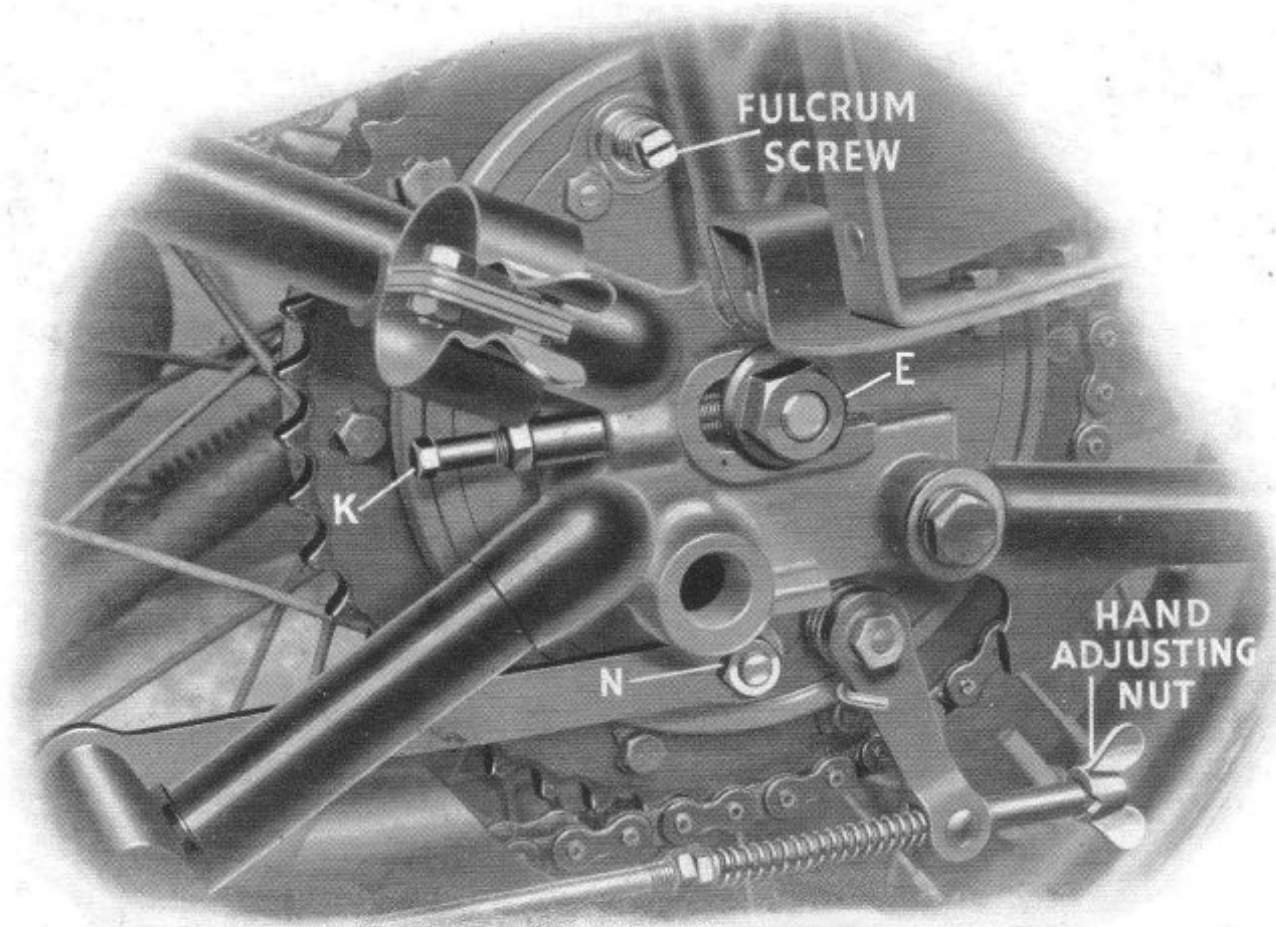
Rear Brake Fulcrum and Chain Adjustment.
